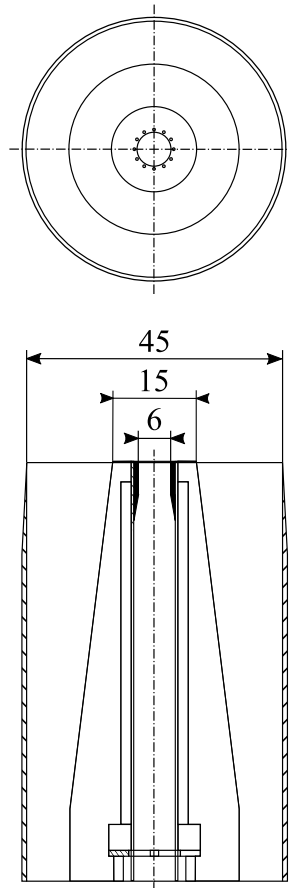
Top and side view of the Delft burner head. Dimensions in mm.
